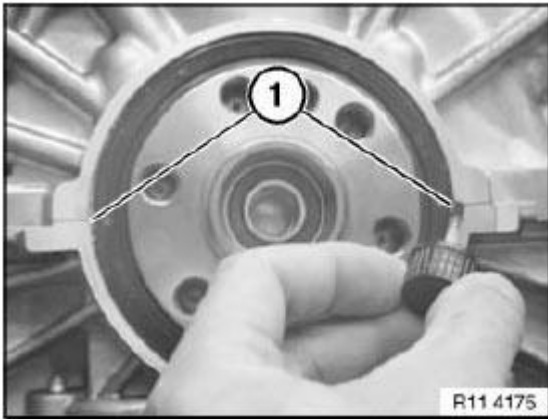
Coating Surface Of Sealing Compound In Both Grooves Using Loctite Primer
